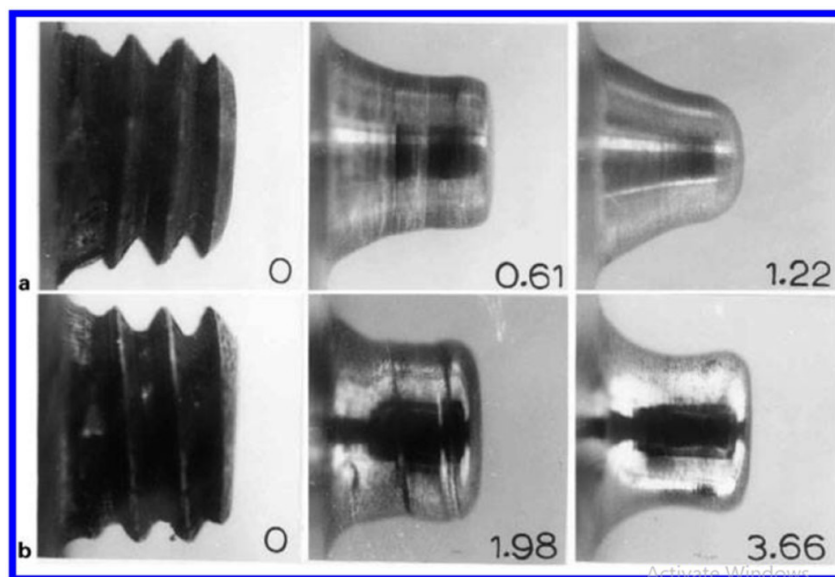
Evolution of tool wear in the FSW of AA6061 with 01 AISI oil hardened tool steel at 1000 rpm rotational speed and welding speed of (a) 3 mm/sec (b) 9mm/sec: distances travelled by tool in meters are indicated in right below for each tool [31].
